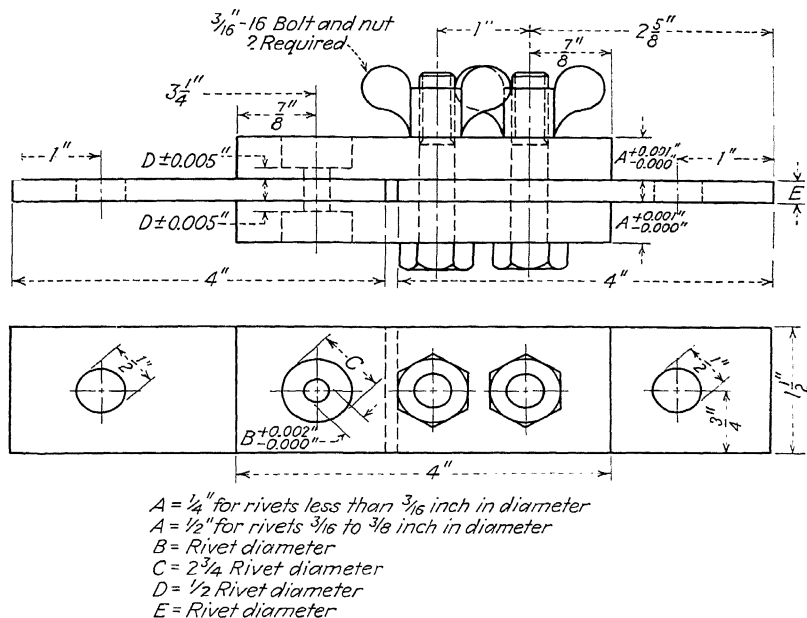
Shear test fixture for the physical shear testing of rivets.
